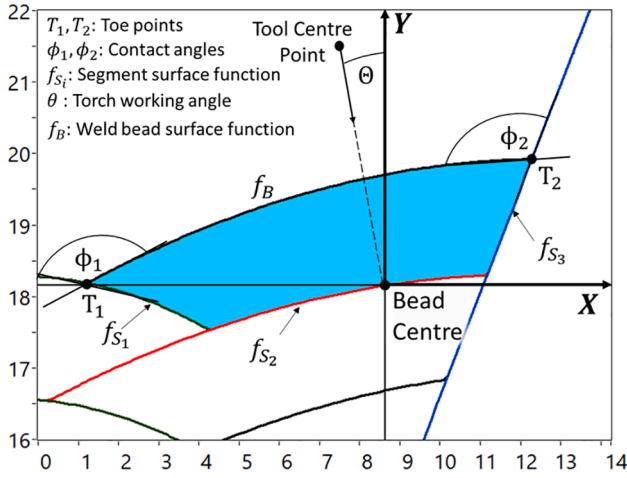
Weld bead and its characteristics in a groove, deposited during multi-pass welding. The bead local coordinate system (LCS) is defined at the bead center.
